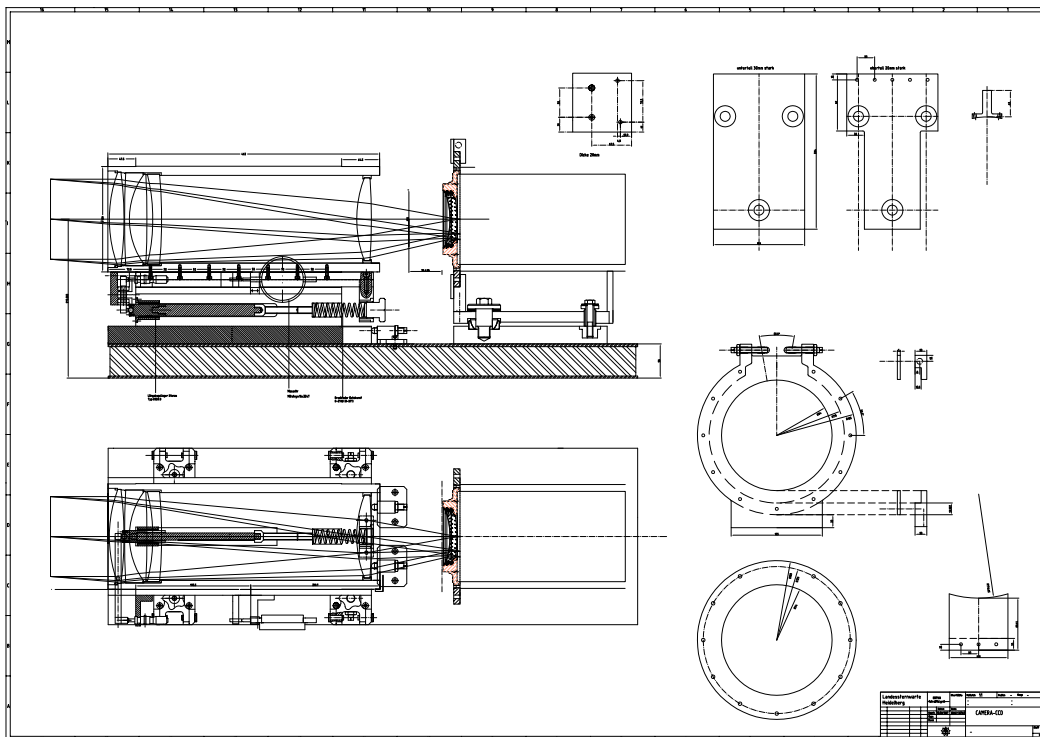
Construction drawing of the mechanical interface of the imaging system.
